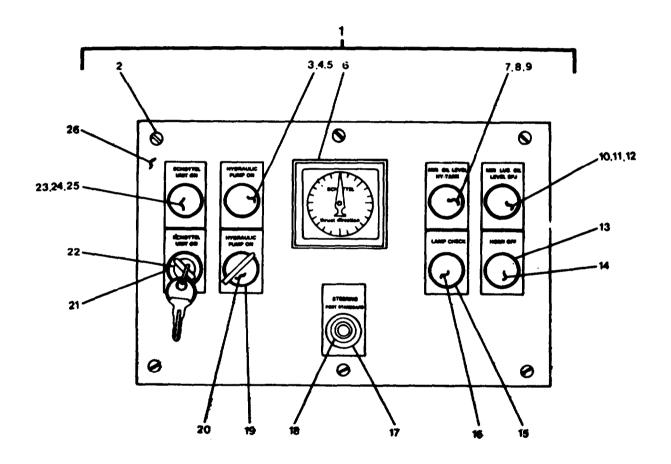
Steering Control Panel Assembly (Sheet 1 of 2).
